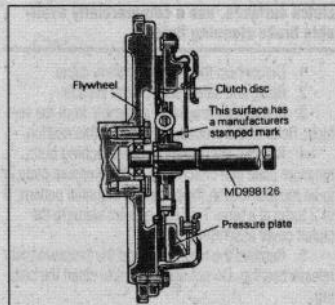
Be sure that the flywheel surface is clean, before installing the clutch
